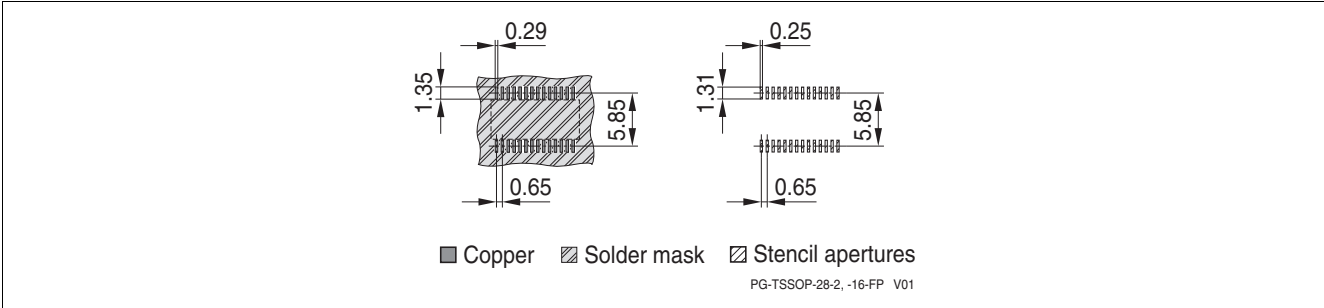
Recommended Footprint PG-TSSOP-28-2
